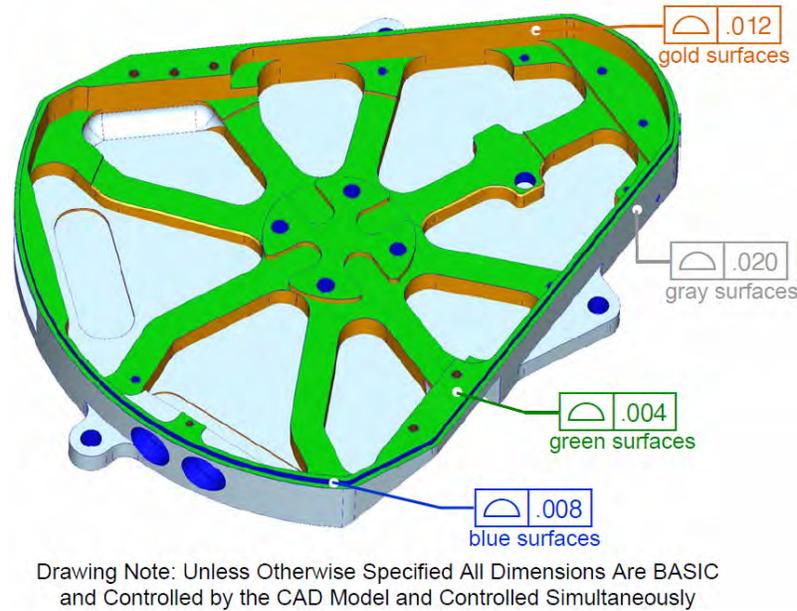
3D Engineering Drawing Example per ASME Y14.41-2003
